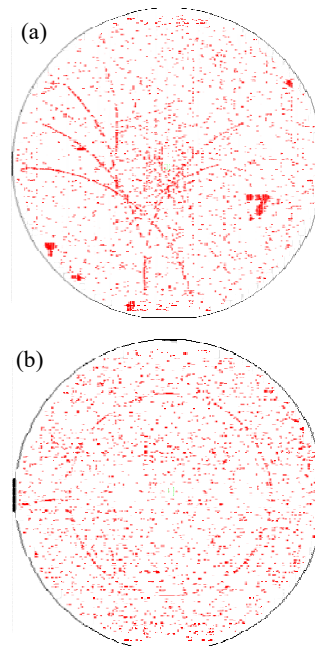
Wafer inspection images with (a) arc-type defect pattern, (b) ring-type defect pattern after metal plug CMP
